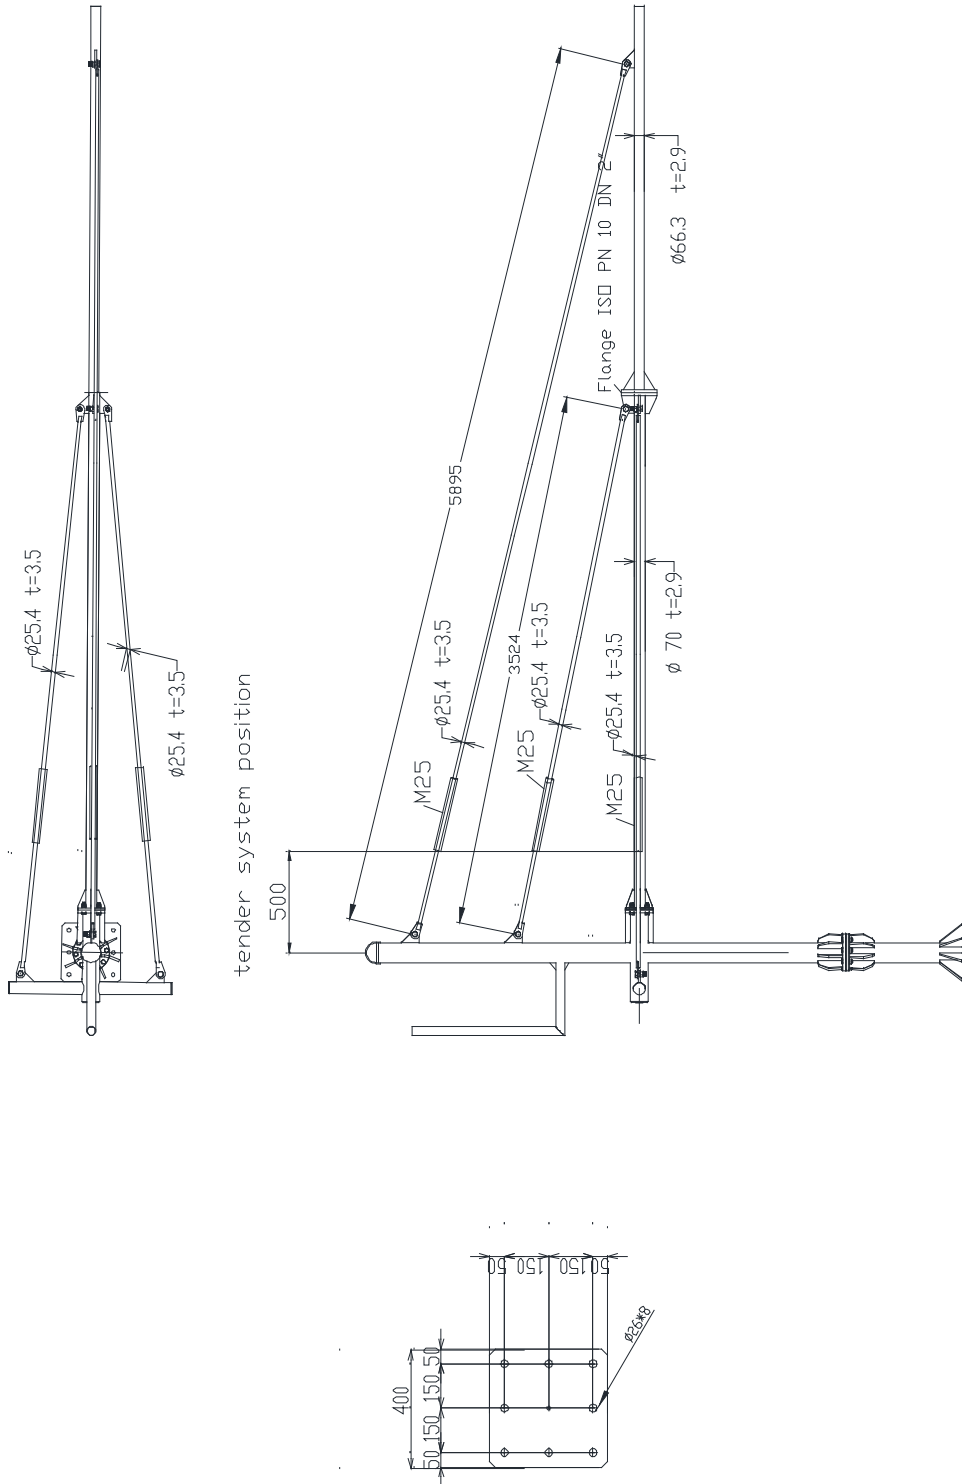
As-built Drawing of Supporting Structure (Pole and Arm)
